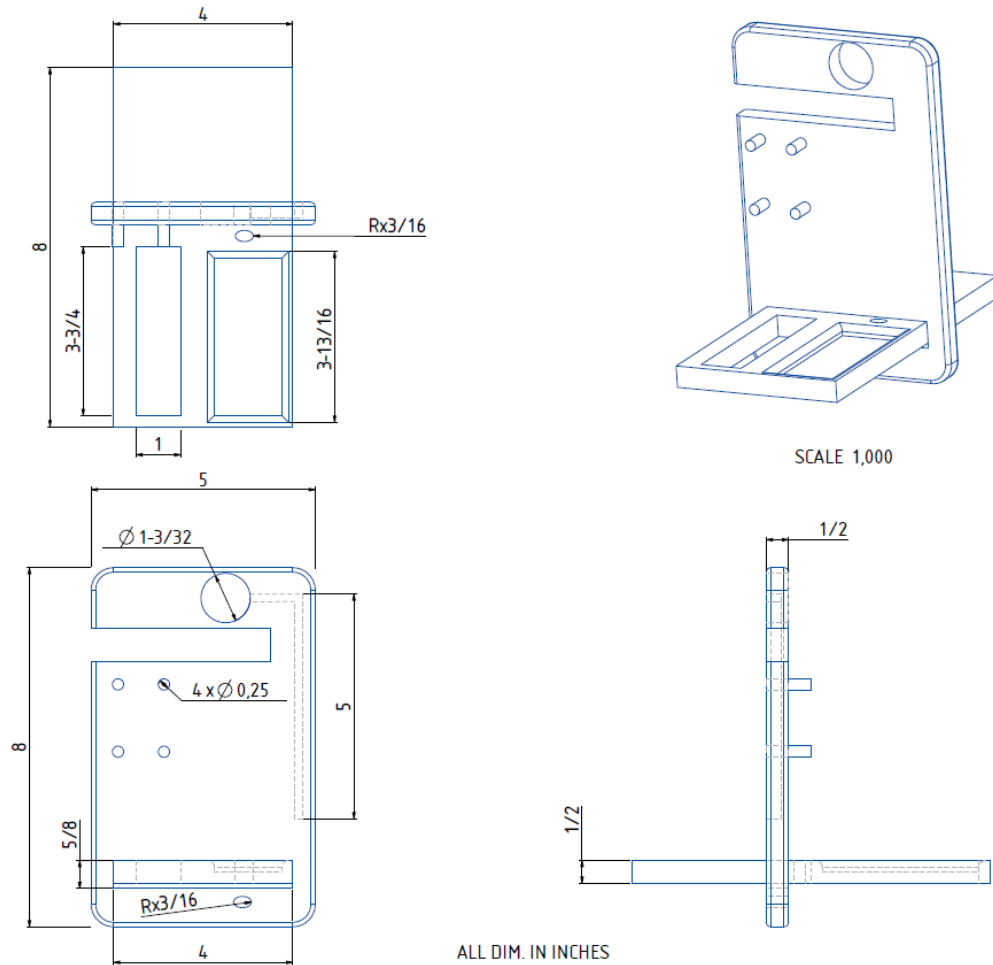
Alpha Prototype, Two-dimensional Design Drawing
